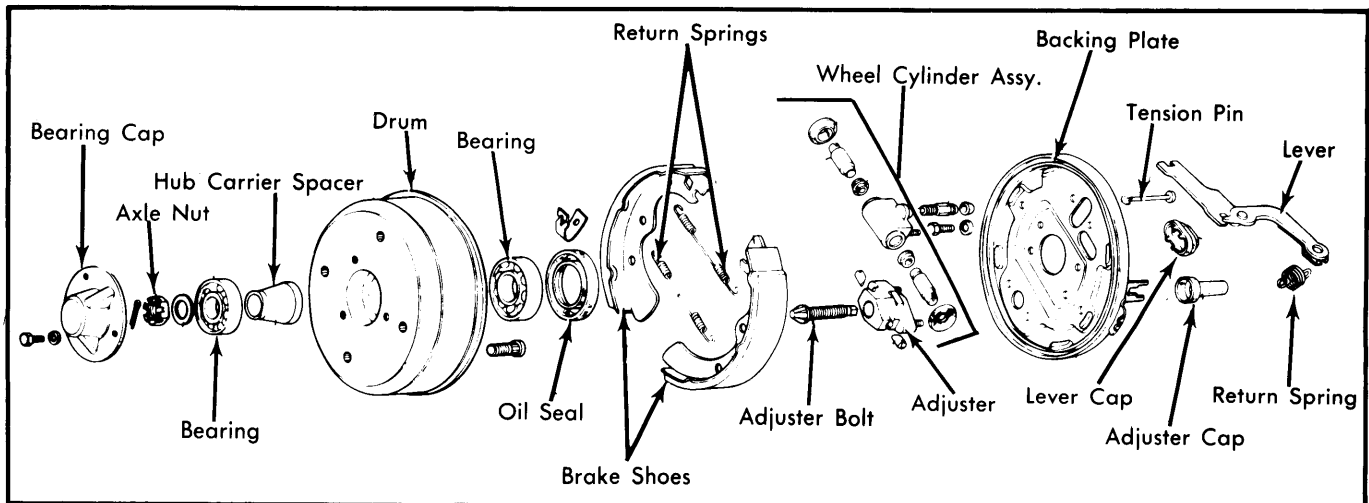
Honda Rear Drum Brake Assembly — Civic Shown — Others Similar
